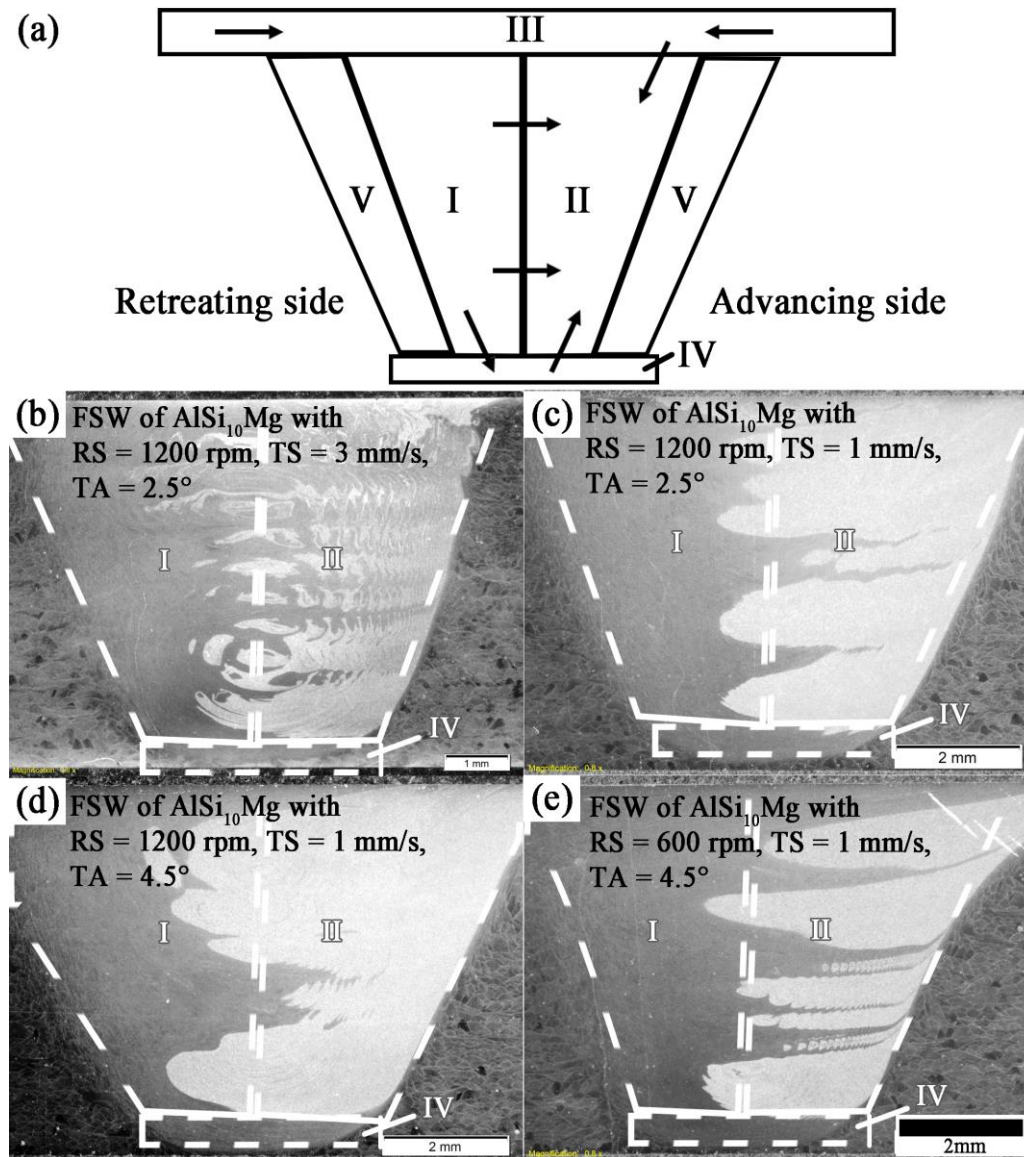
Schematic diagram (a) showing flow partition of various zones; A cross-sectional view of the weld zone from various FSW welds, with lighter region showing material from the advancing side of the weld.
